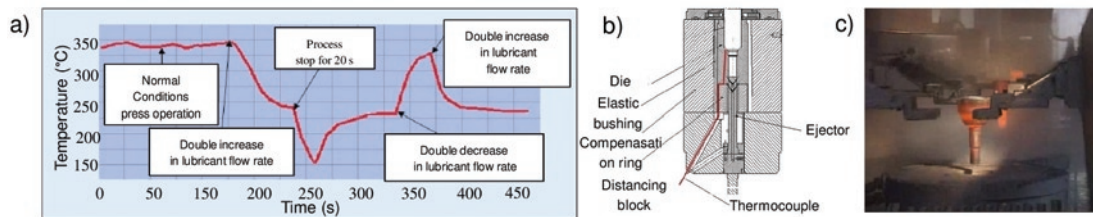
a) A view of the die temperature change during forging with marked most frequently occurring process disturbances, b) the scheme of the thermocouple mounting into the tool, c) transfer of forgings on the transfer press
